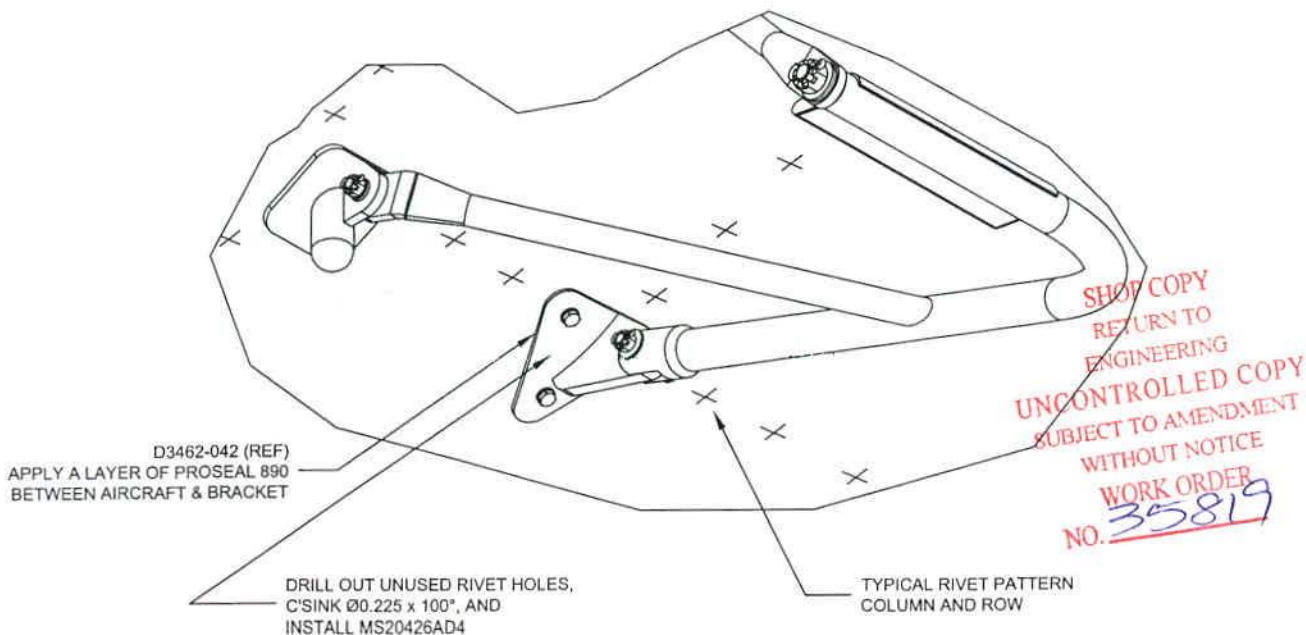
Detail View D3462-042 Bracket Assembly (-032 Installation, Shown) D3462-041, (-031 Installation Opposite)
